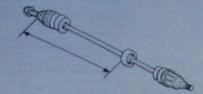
Vibration damper positioning dimension (Sec 5)
